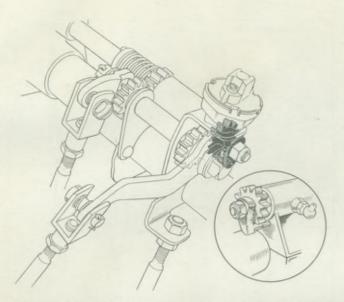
Line Drawing of R.H.S. gear shift control unit.
